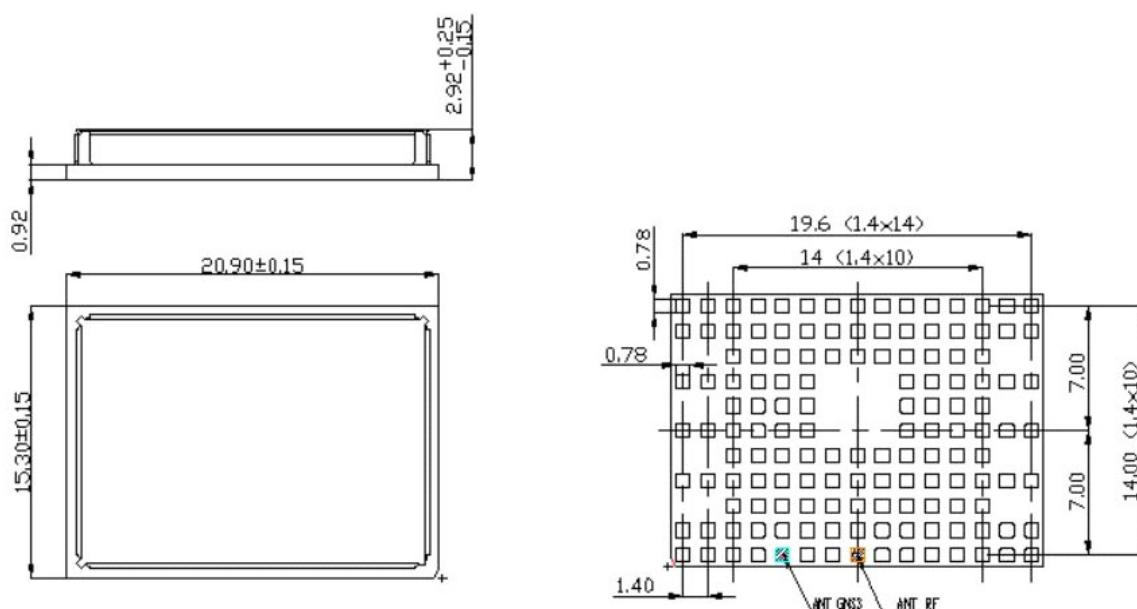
Dimensions of TX82-W-B and TX62-W-C (all dimensions in mm)
